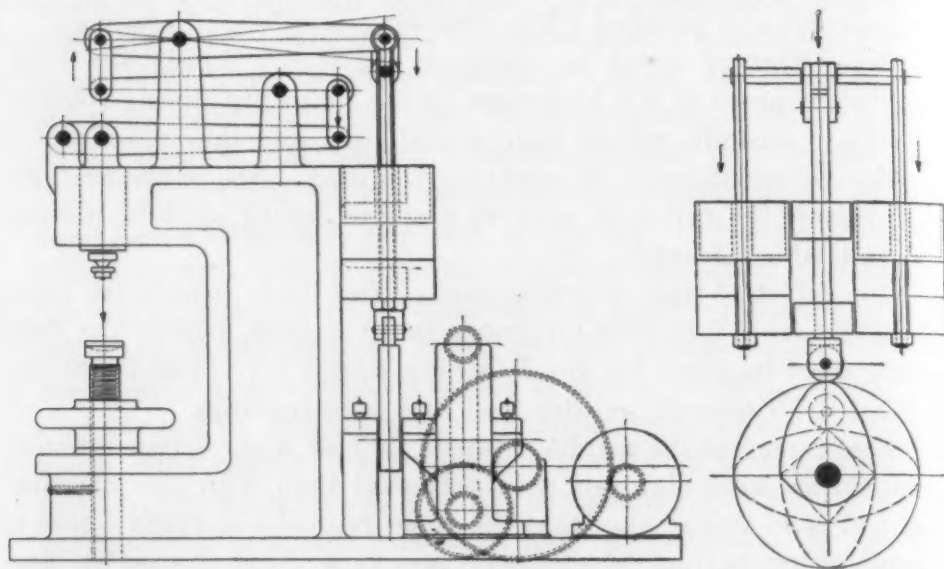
Drawing Showing Side and End View of An Improved Hardness Testing Machine.
